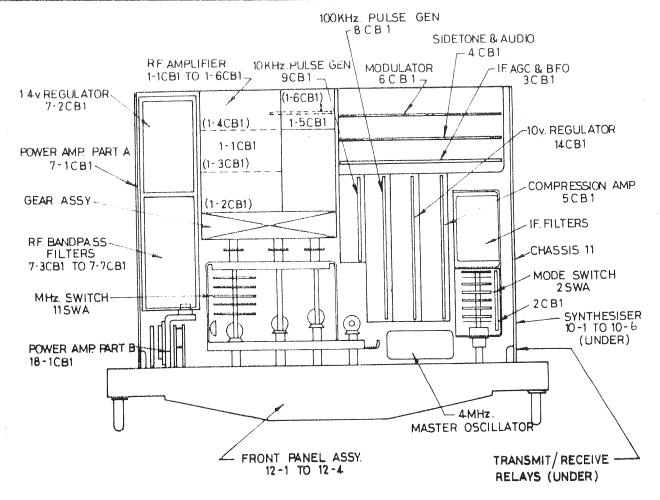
LOCATION OF MODULES AND ASSEMBLIES (ABOVE CHASSIS VIEW)
